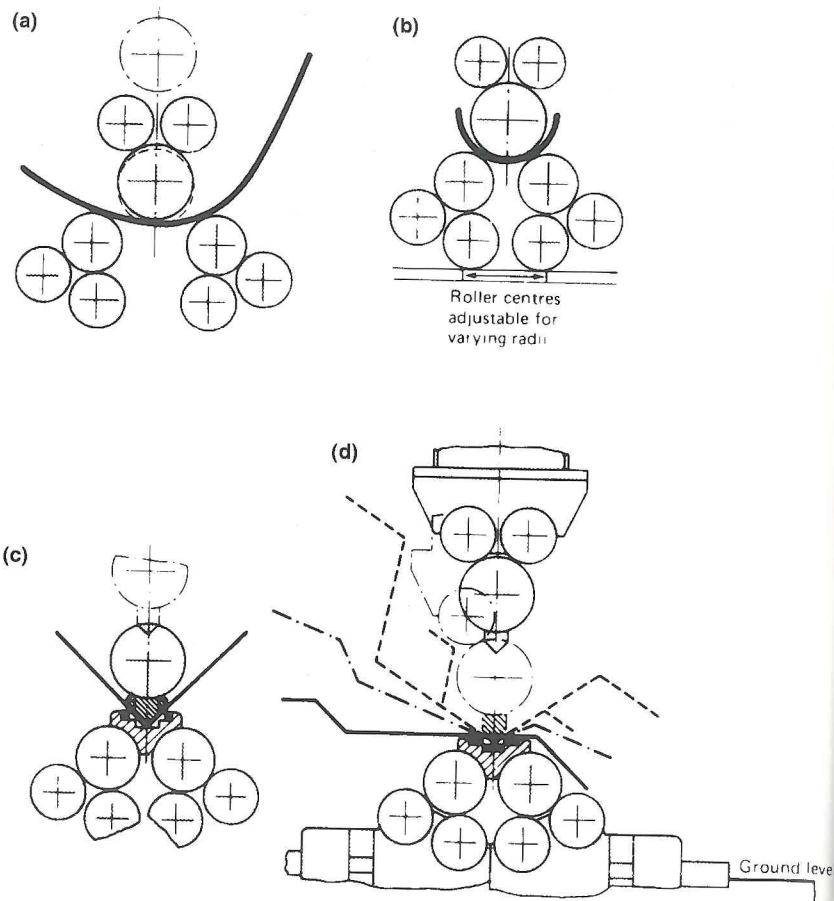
Roll press operations: (a) shear strake rolling; (b) half-round rolling for masts, derrick posts, etc.; (c) 90-degree flanging; (d) bulkhead flanging
